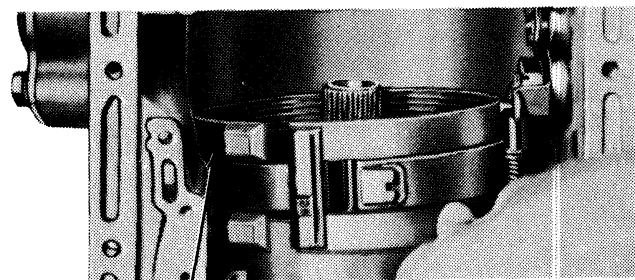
Removing or Installing Reverse Ring Gear Hub Snap Ring
